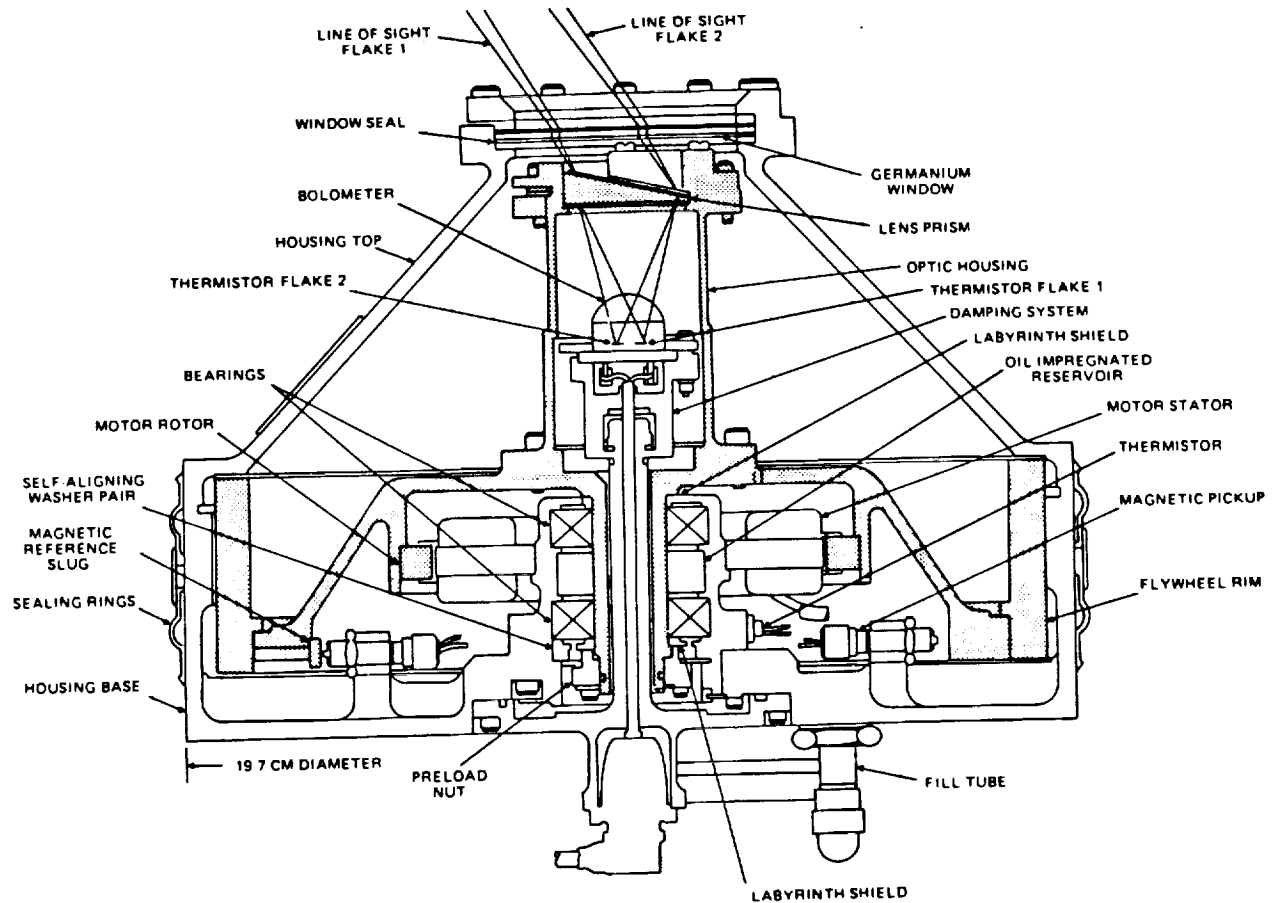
The original ITHACO Type B SCANWHEEL was manufactured by Bendix Corp. Shading indicates rotating components consisting of flywheel and prism assembly.
